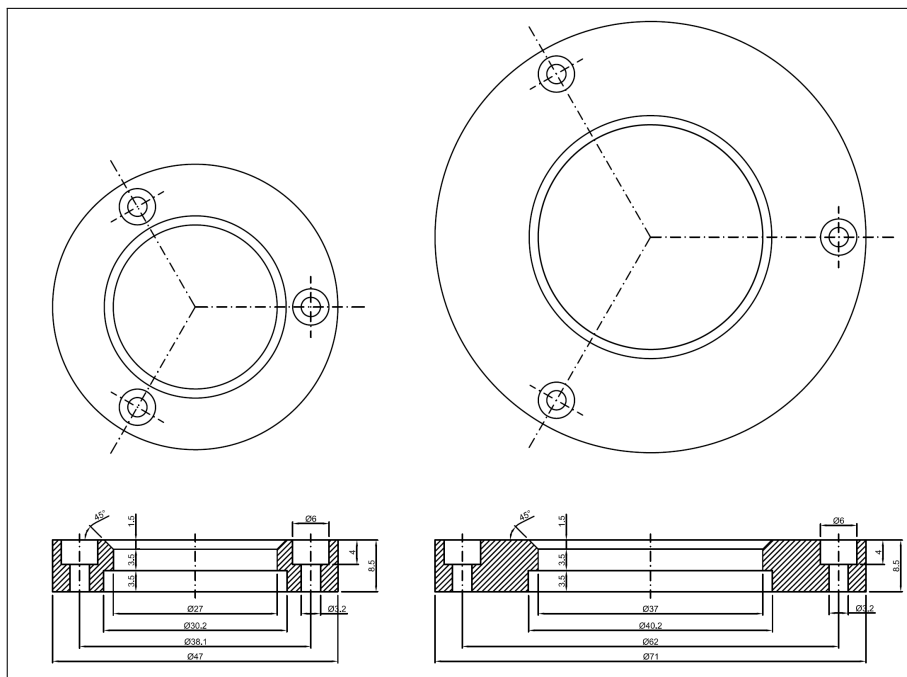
Drawing of existing dry and lubrication sample holders.
